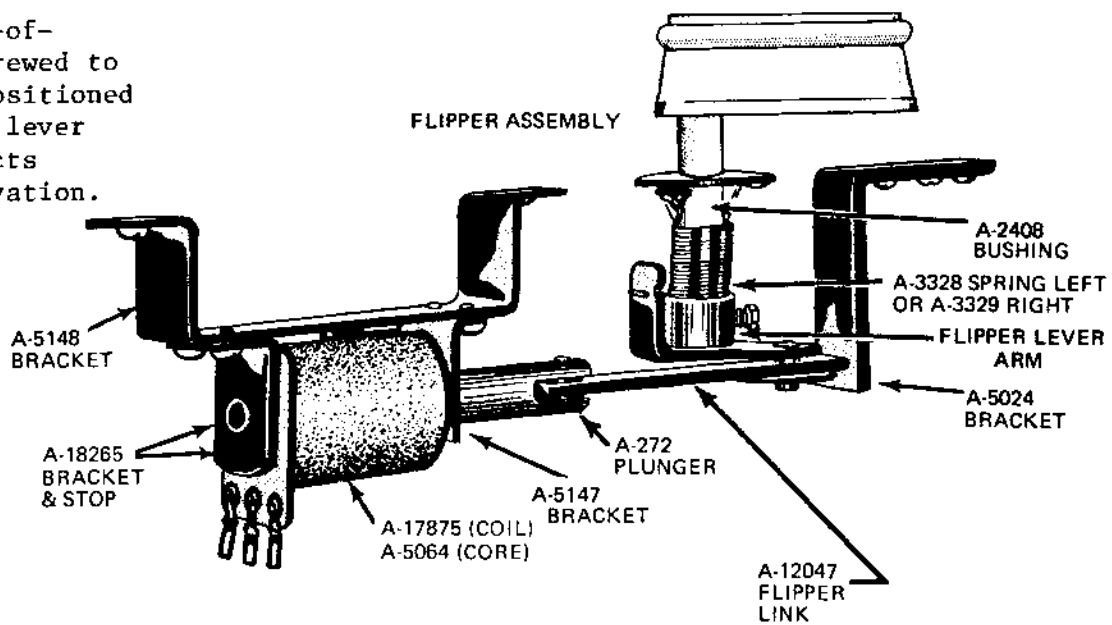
FIGURE III. ALTERNATE FLIPPER ASSEMBLY
